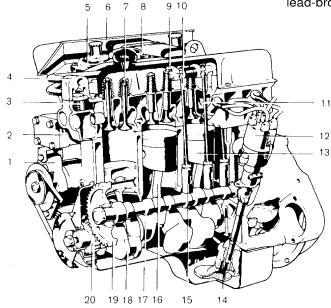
X-ray view of 4-cyl. engine, type AQ130
